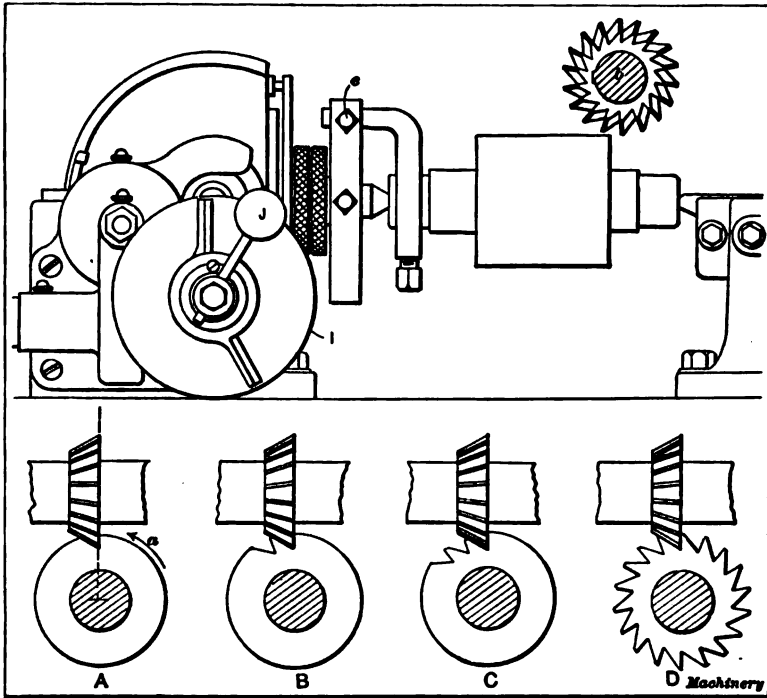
Views Illustrating Use of Spiral Head for Indexing
